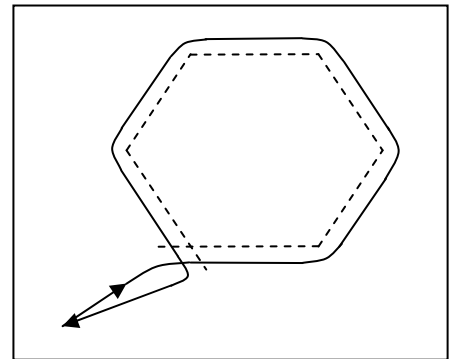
(b) Use with cutter compensation and tool nose radius compensation
